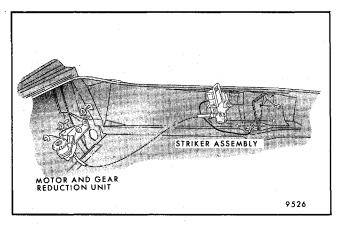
Typical Cadillac C, K Style Closing Unit
